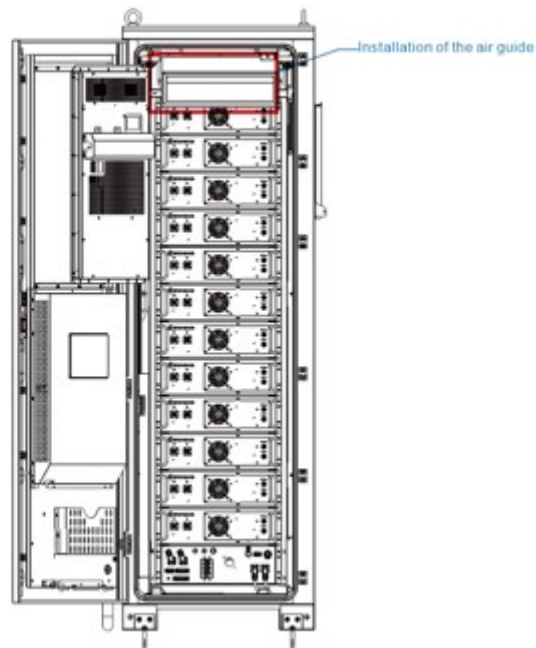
Reinstall The Removed Air Hood Schematic
